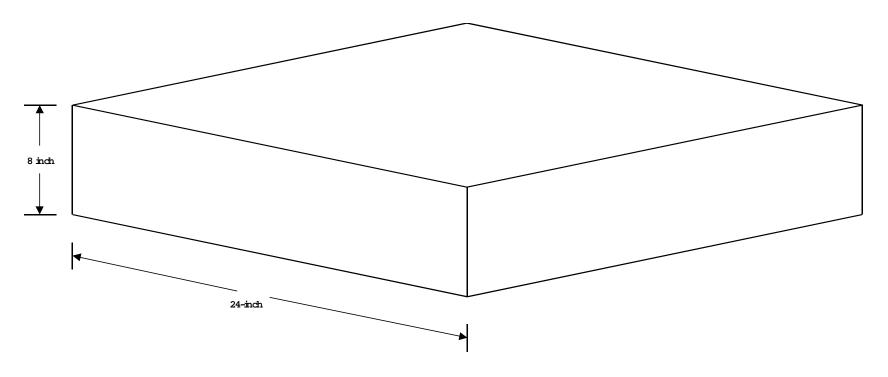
Proposed Dimensions of the Wooden Box for Storage of Depleted Uranium Metal Billets in the New Stacking Arrangement
